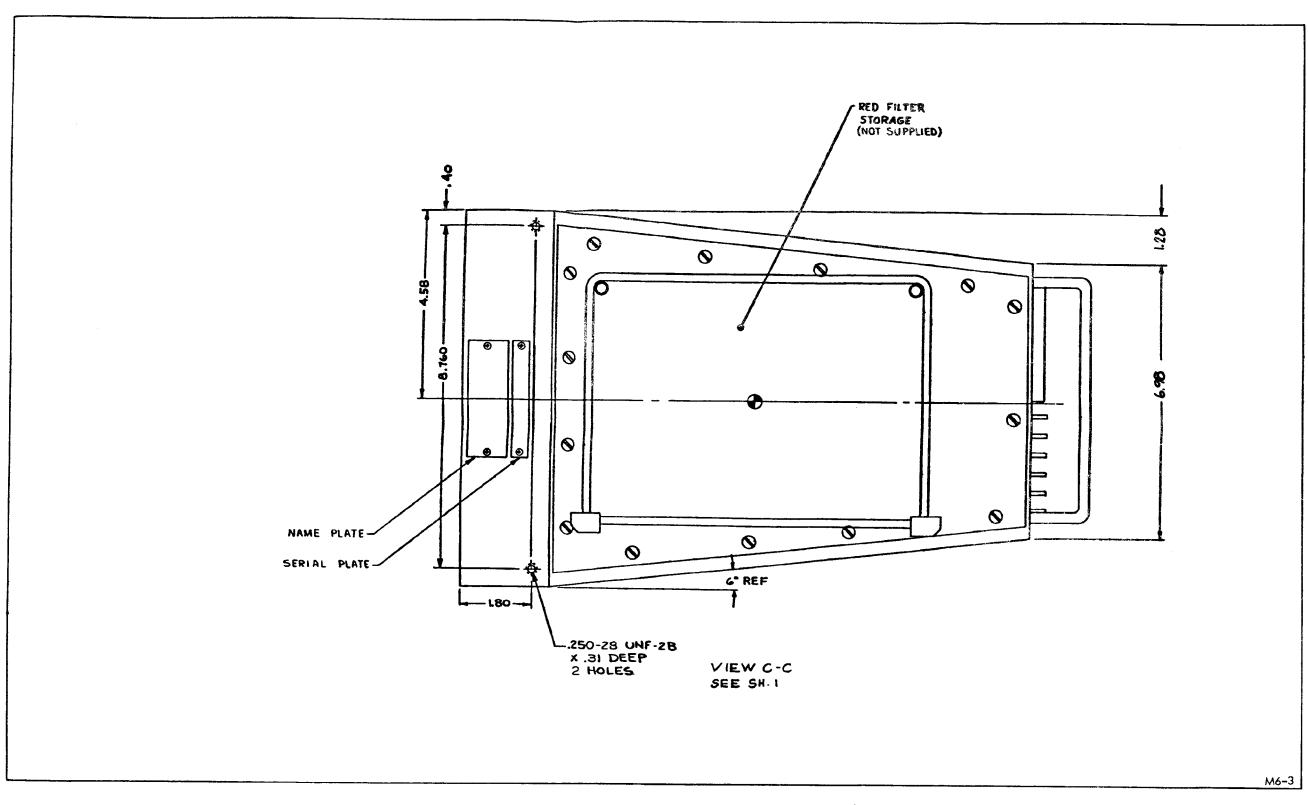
Indicator, video, outline drawing. (sheet 3 of 4)
